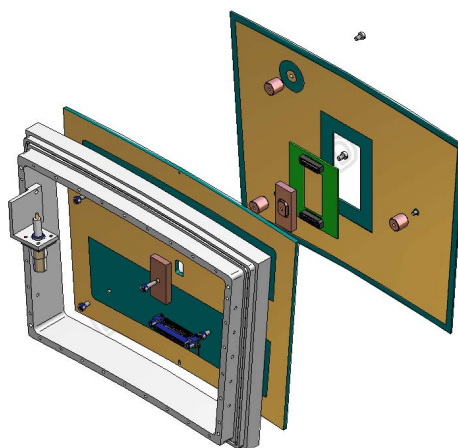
The eight chips module for the LCTPC large prototype is composed of an aluminum frame, a mother PCB, a daughter PCB and a guard plate.
